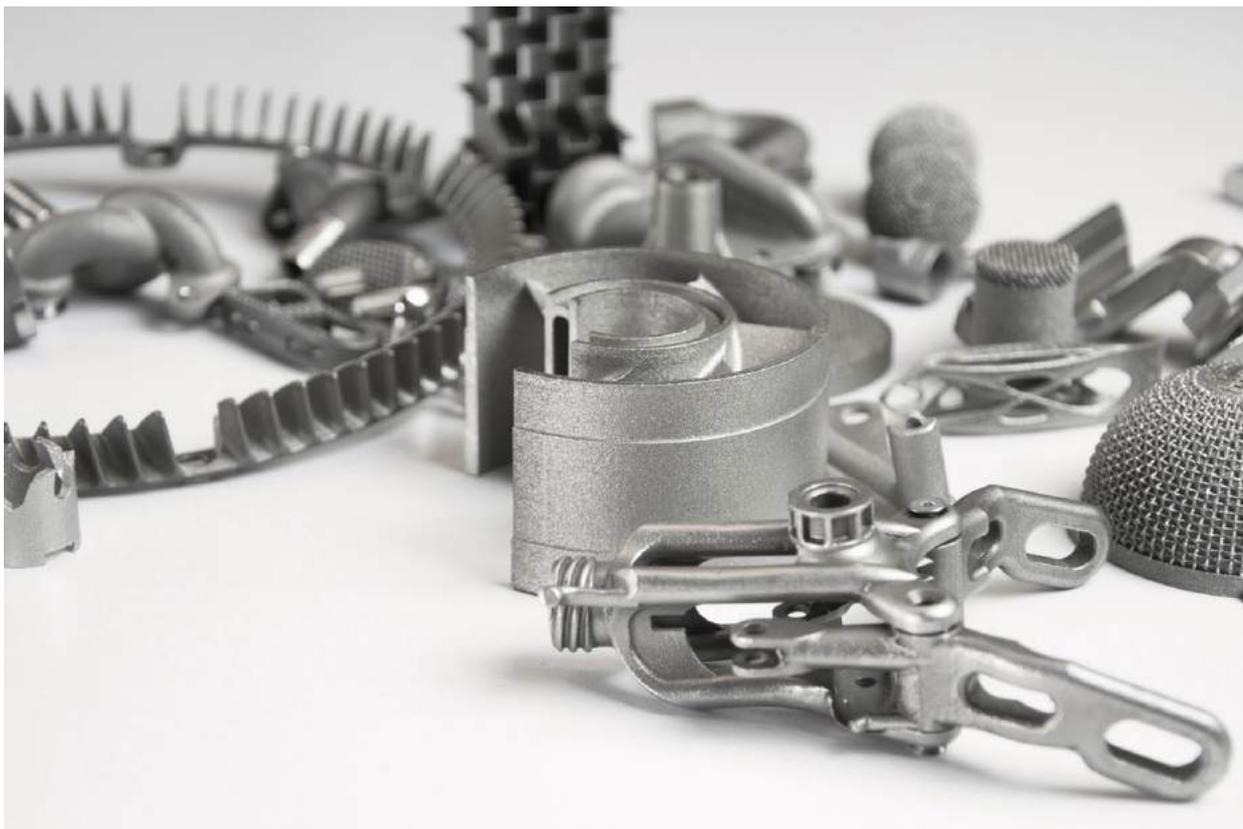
A selection of metal additively manufactured parts produced by BEAMIT (Courtesy BEAMIT)
